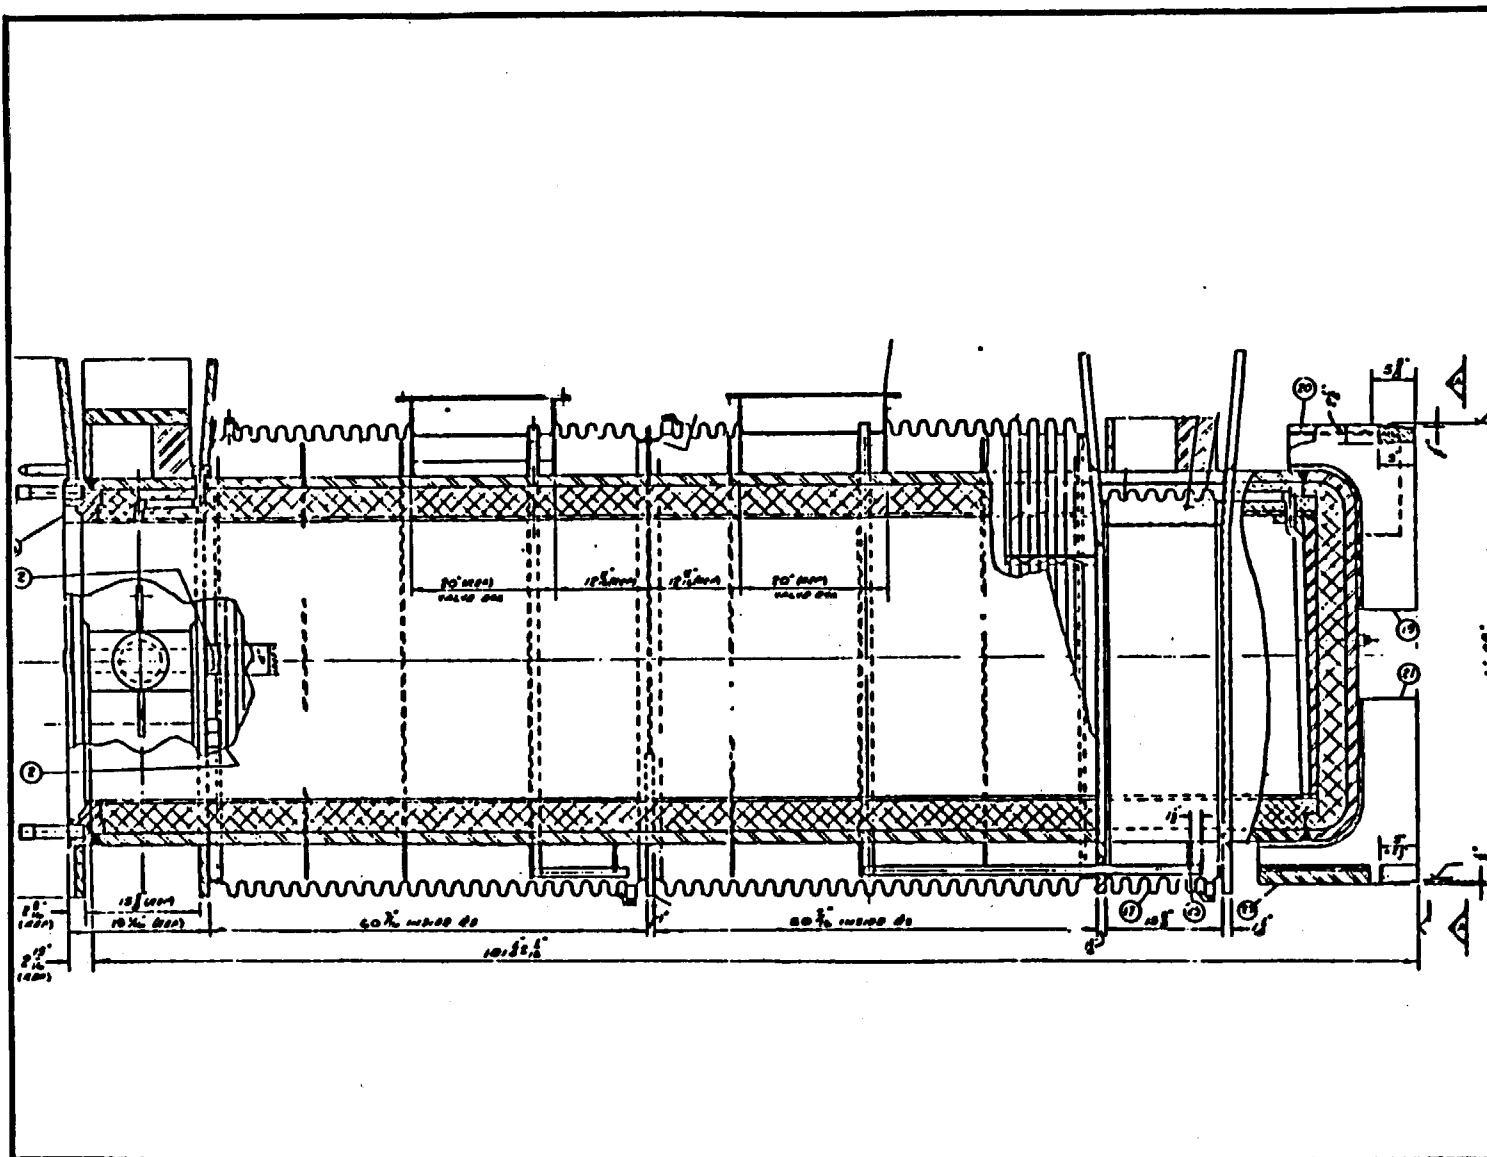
SECTIONAL VIEW OF CASK BODY
